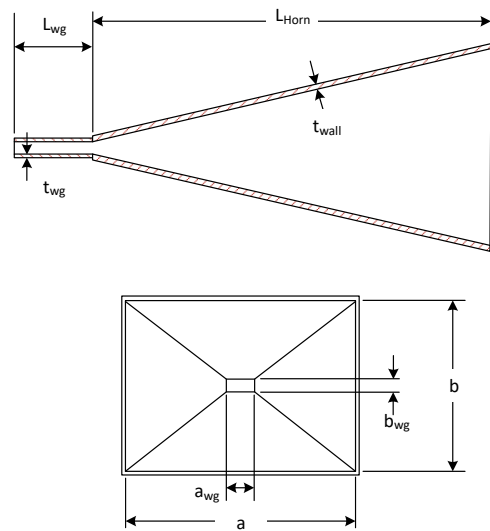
Dimensions of Standard Gain Horn Antenna used for the tolerance study.
